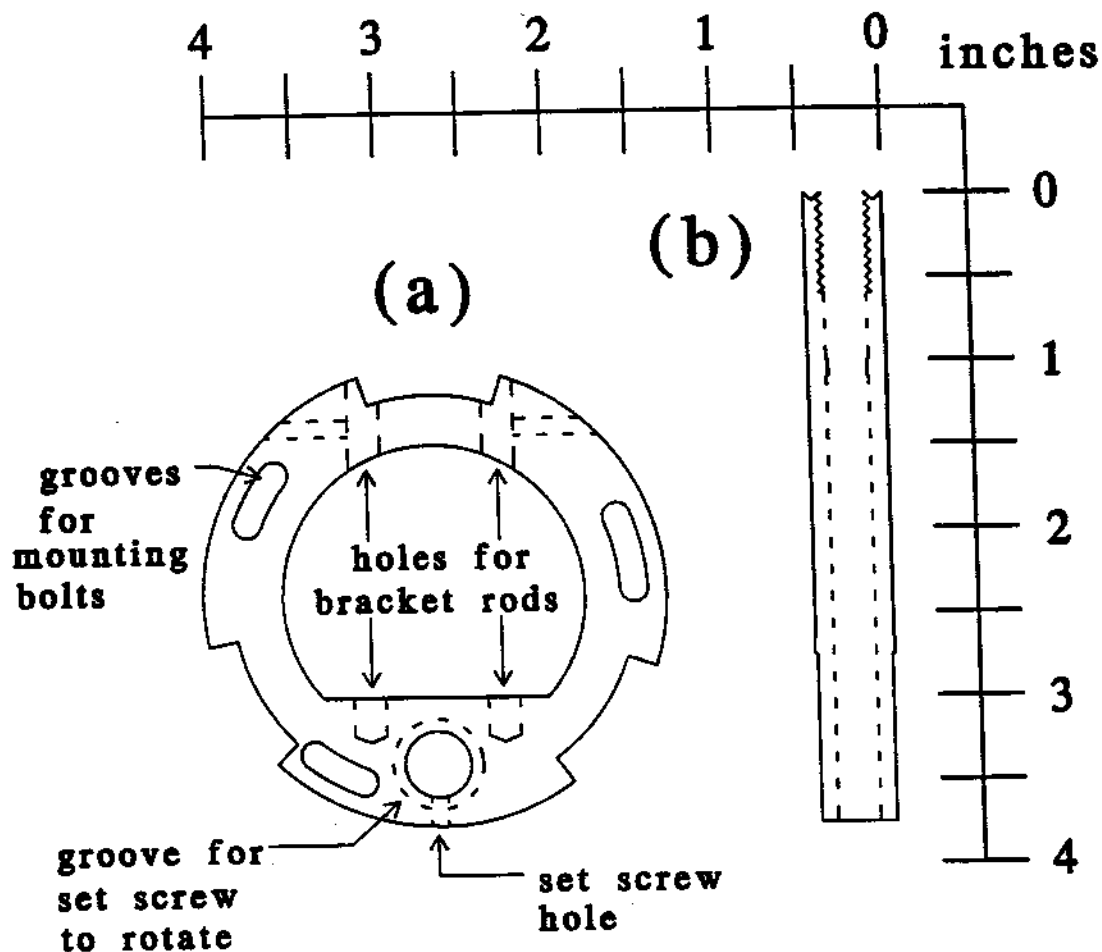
Cross-sectional view of (a) the ring clamp, and (b) the moving source holder.
